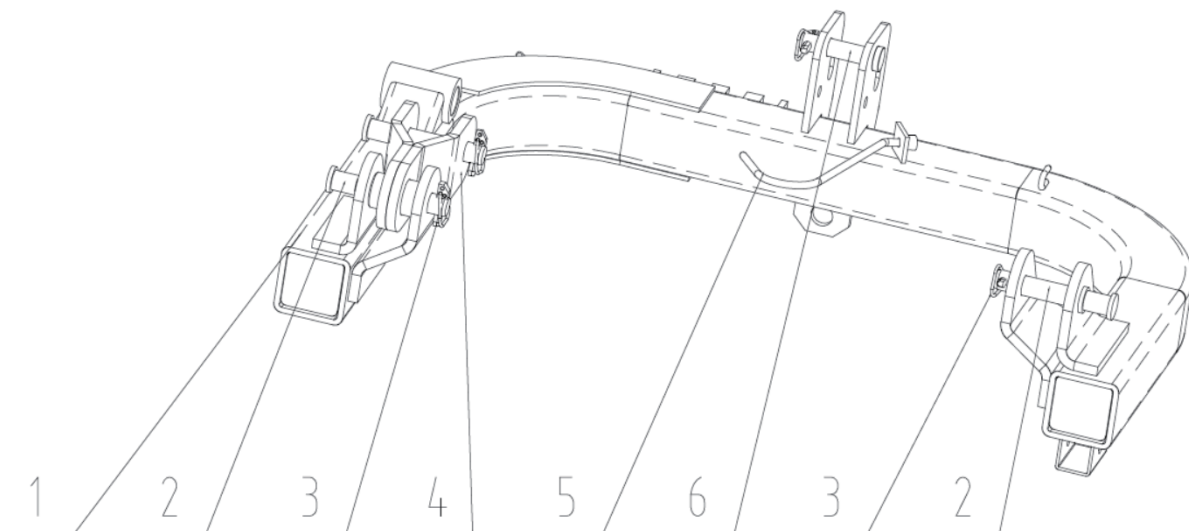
Hitch Tube Weldment and Fittings
